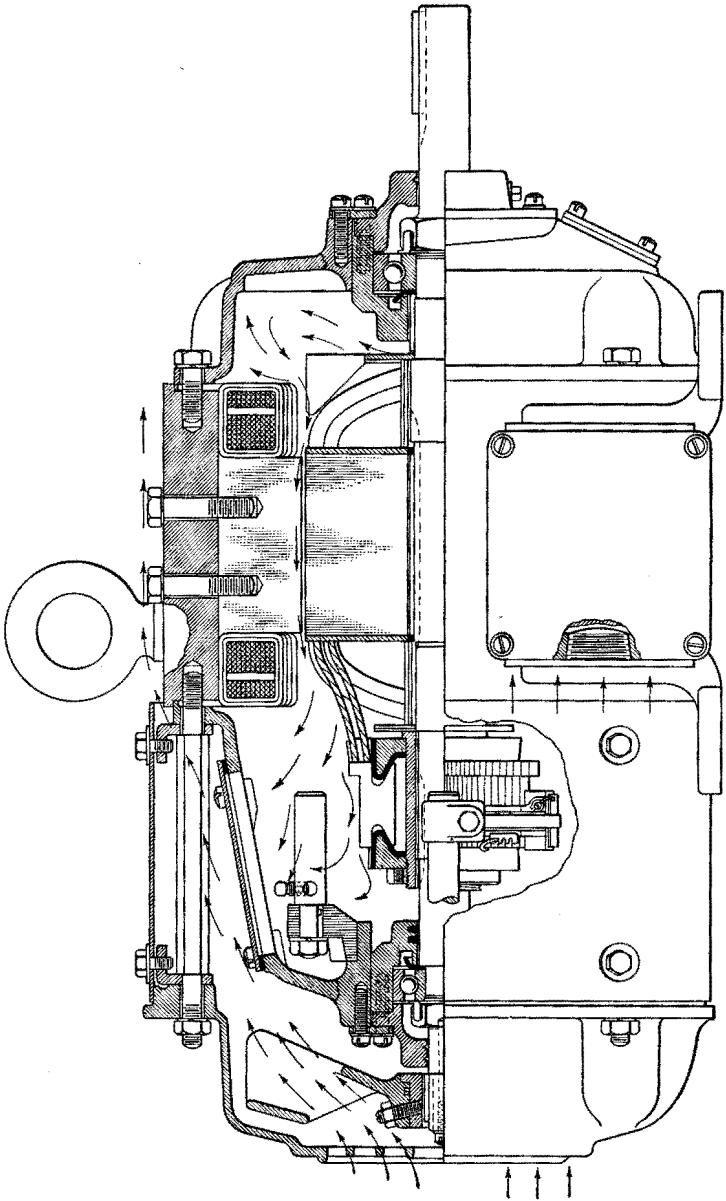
Totally Enclosed Fan-Cooled Motor
